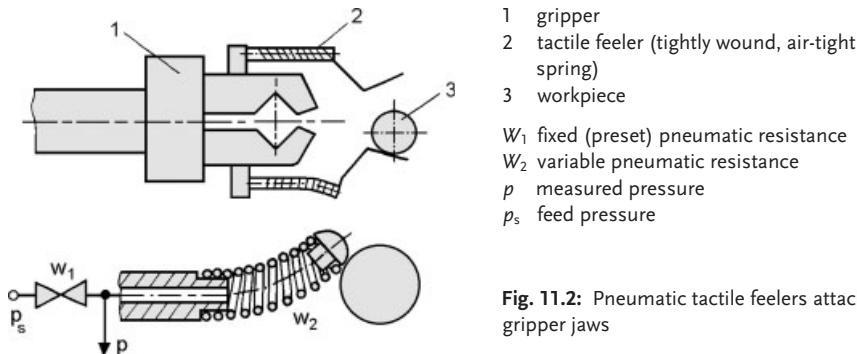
Pneumatic tactile feelers attached to gripper jaws
